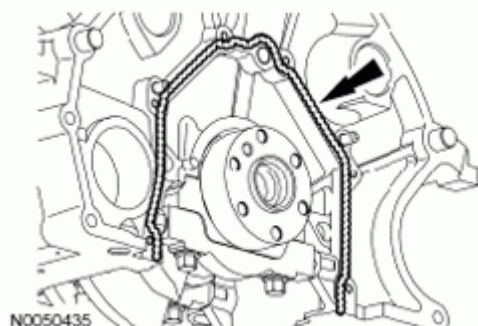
Identifying Crankshaft Rear Seal Retainer Plate Mating Surface On Engine Block
